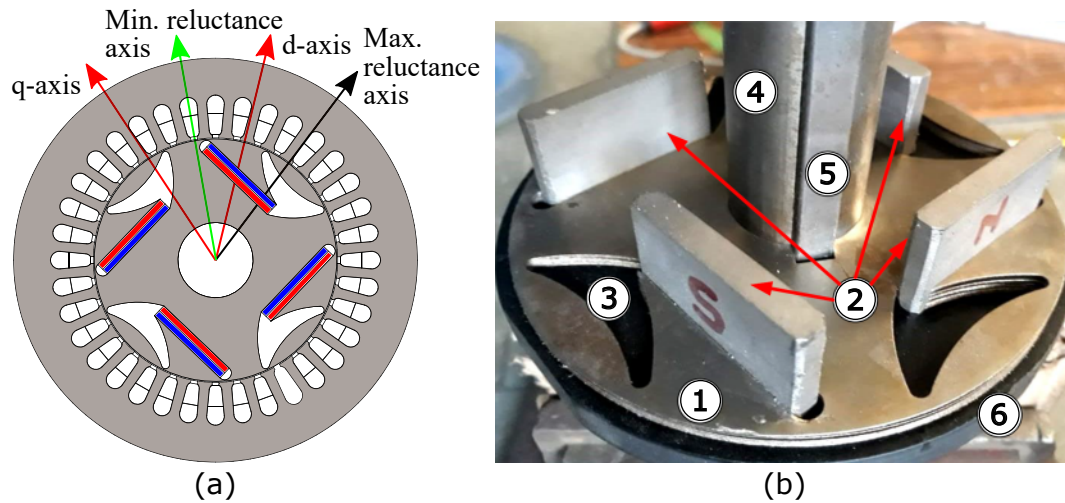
Motor prototyping. (a). Motor geometry. (b). Prototyped rotor. 1. Rotor lamination stack. 2. SmCo18 magnets. 3. Air barrier. 4. Shaft. 5. Key-way. 6. Bakelite end-plate.
